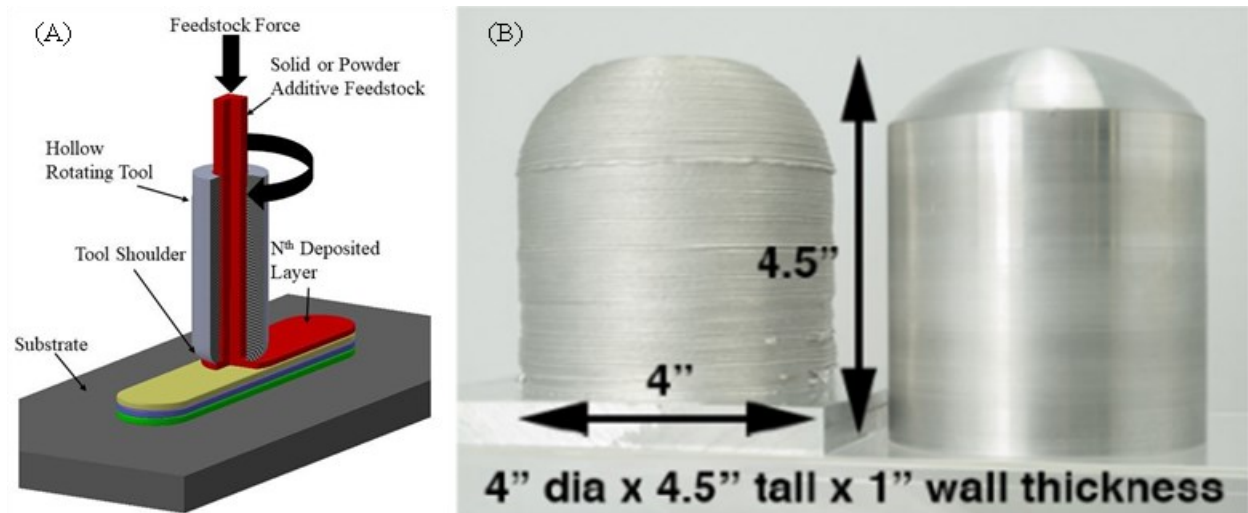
(a) Schematic of AFS/MELD manufacturing technique and (b) pressure vessel produced by AFS/MELD technique.
